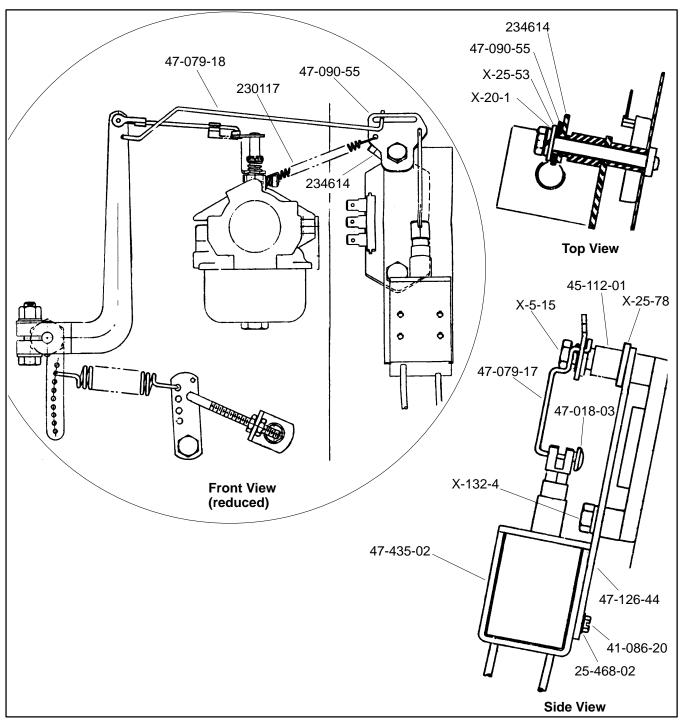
Econothrottle Assembly 228653 (6MM/CM).
